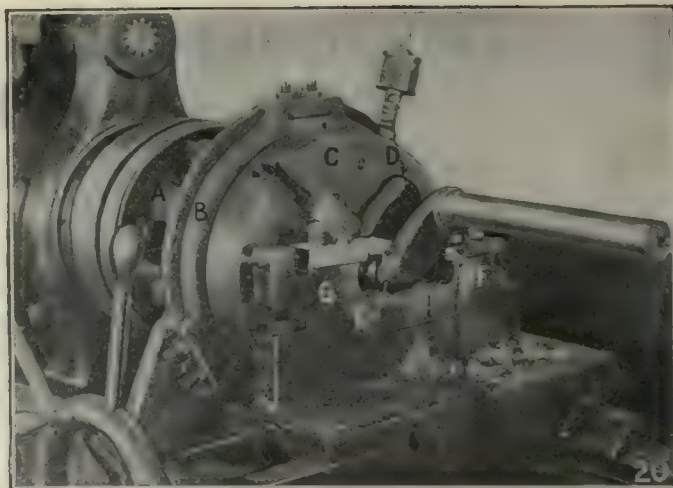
SPECIAL CRANKPIN LATHE FOR SMALL SHAFTS
